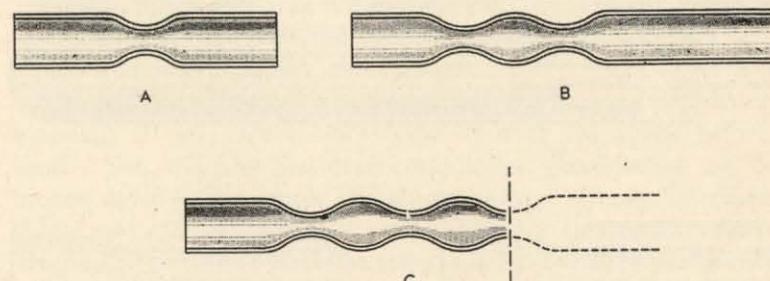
MAKING THE RIFFLED SIDE TUBES
